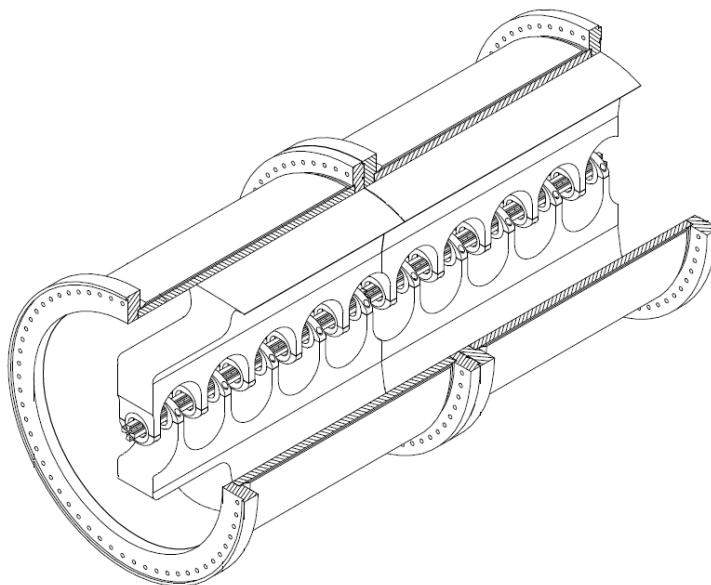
IH type RFQ (36 MHz machine at GSI) [Rat96].
